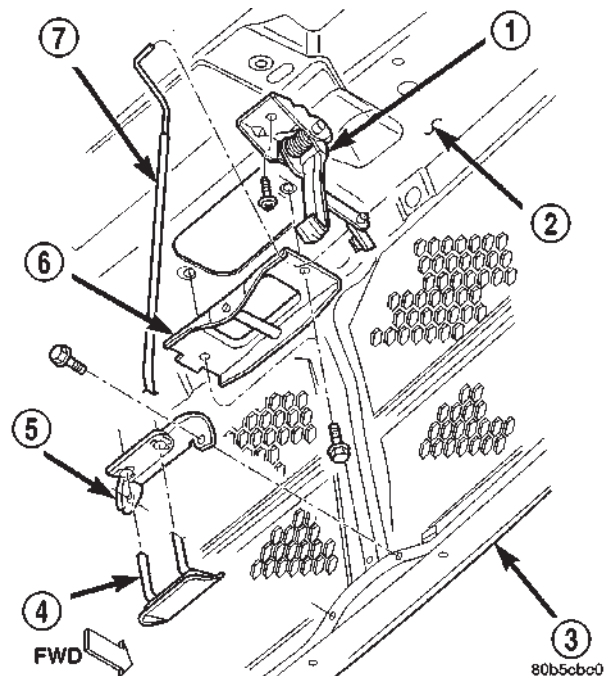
Hood Safety Catch and Latch Striker — SLT
